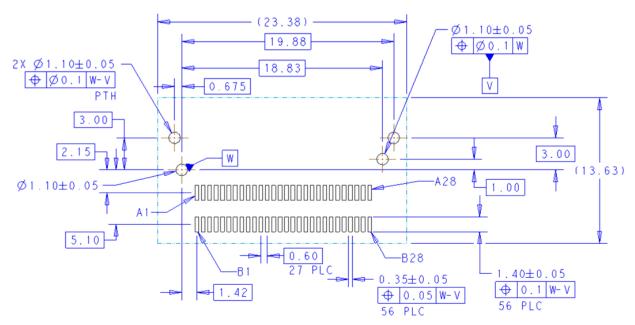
1C RIGHT ANGLE CONNECTOR FOOTPRINT
